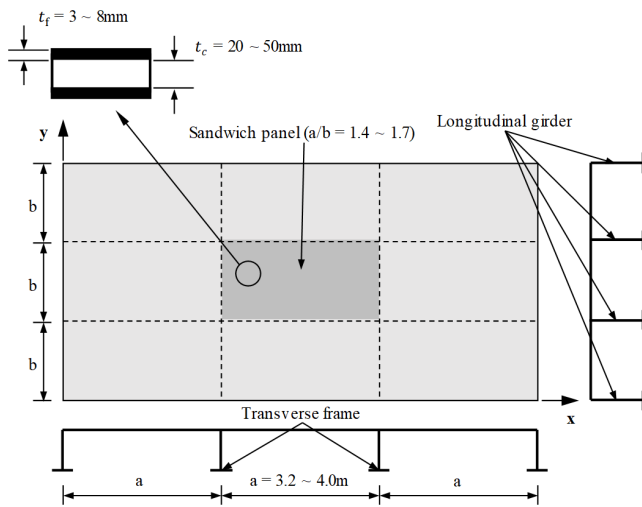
A schematic diagram of the sandwich panel arrangement (Ramakrishnan and Sunil Kumar, 2016)
